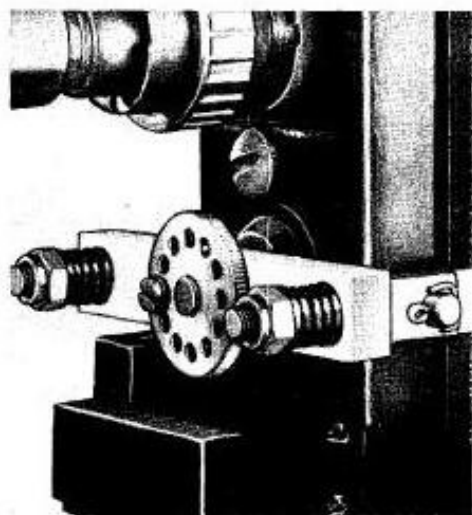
View showing ram end bar end buffer (Pre-Mod. 1)
